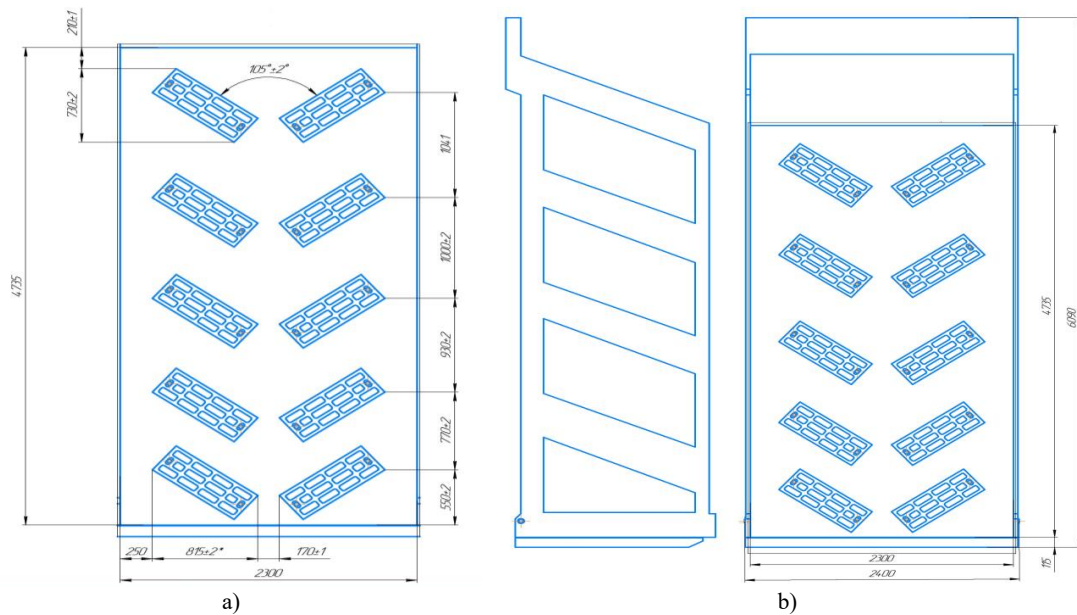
The shape and installation scheme of the covering installed on the lower part of the body;
